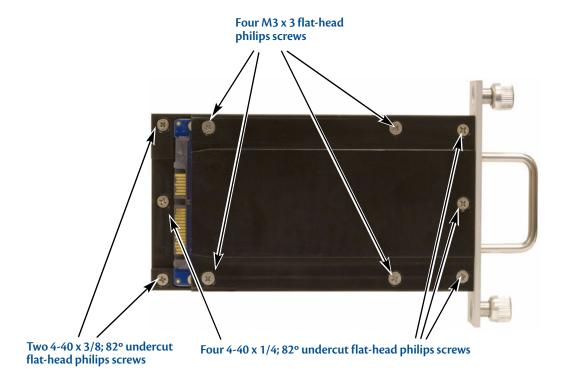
IDAN-RSATA-SYS104 Drawer (Carrier)
